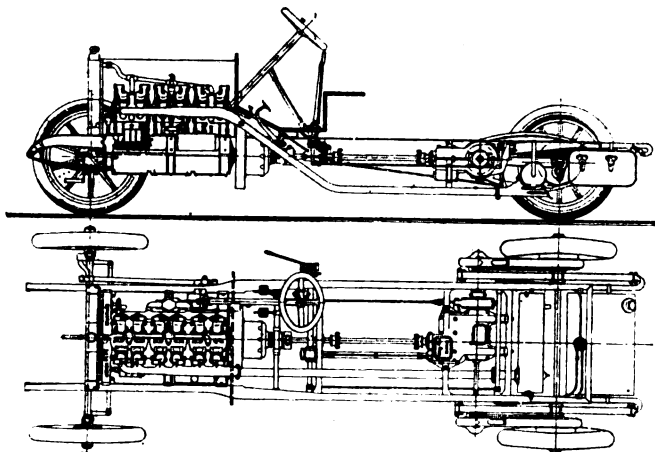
Elevation and Plan of Pipe 40-h.p. Six-Cylinder Chassis.
